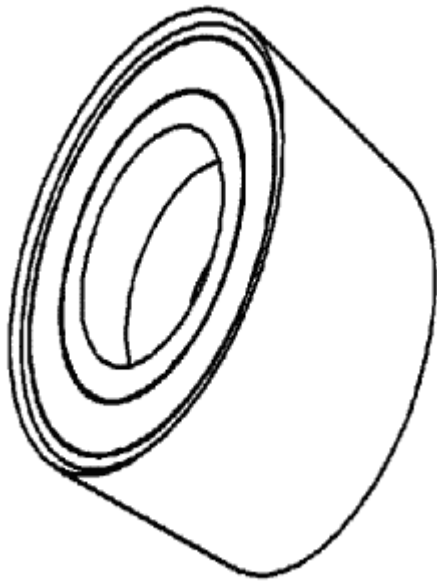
FRONT SEAL INSTALLER 9506
